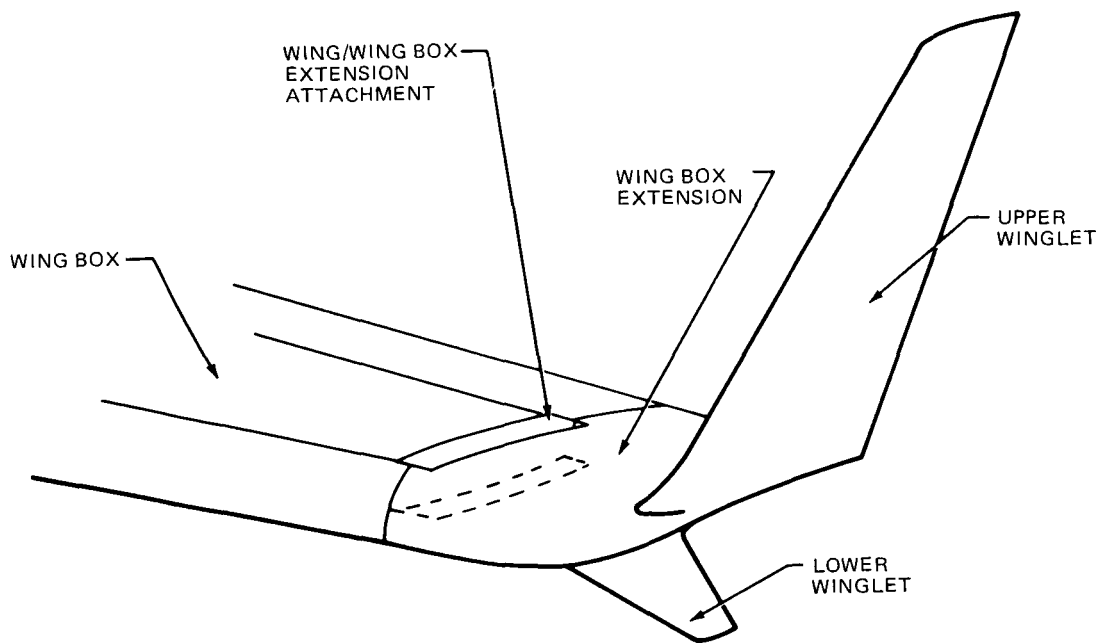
WINGLET INSTALLATION COMPONENTS
